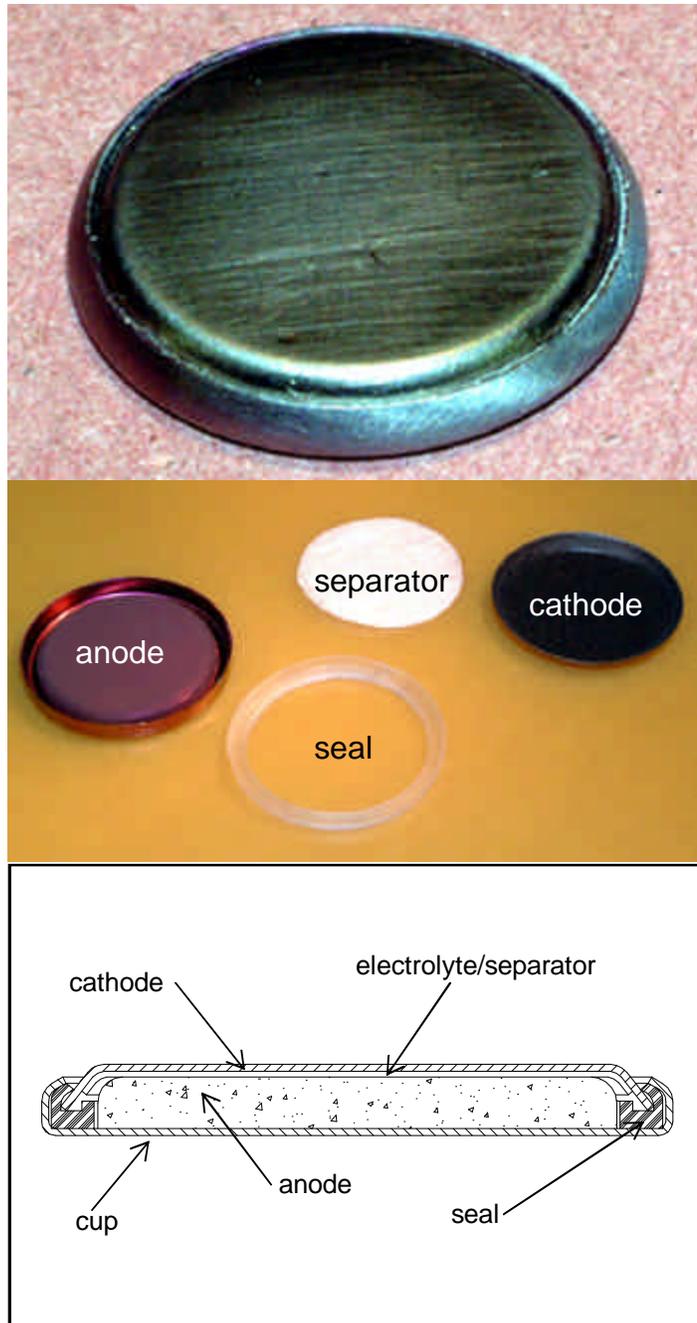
Cross section view of button cell showing major components. The case top and bottom are made from tantalum. The capacitor is assembled dry, and electrolyte is admitted by vacuum impregnation process. Final seal is secured by crimping the exterior perimeter of the anode cup.
